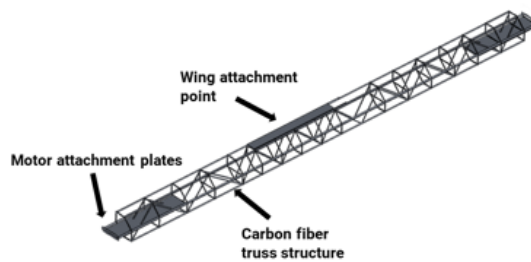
An isometric view of the motor boom structure. The wing attachment plate is joined to a rib-like structure which is connected to the main spar. The motors are mounted on top of the motor attachment plates on both sides of the boom.
